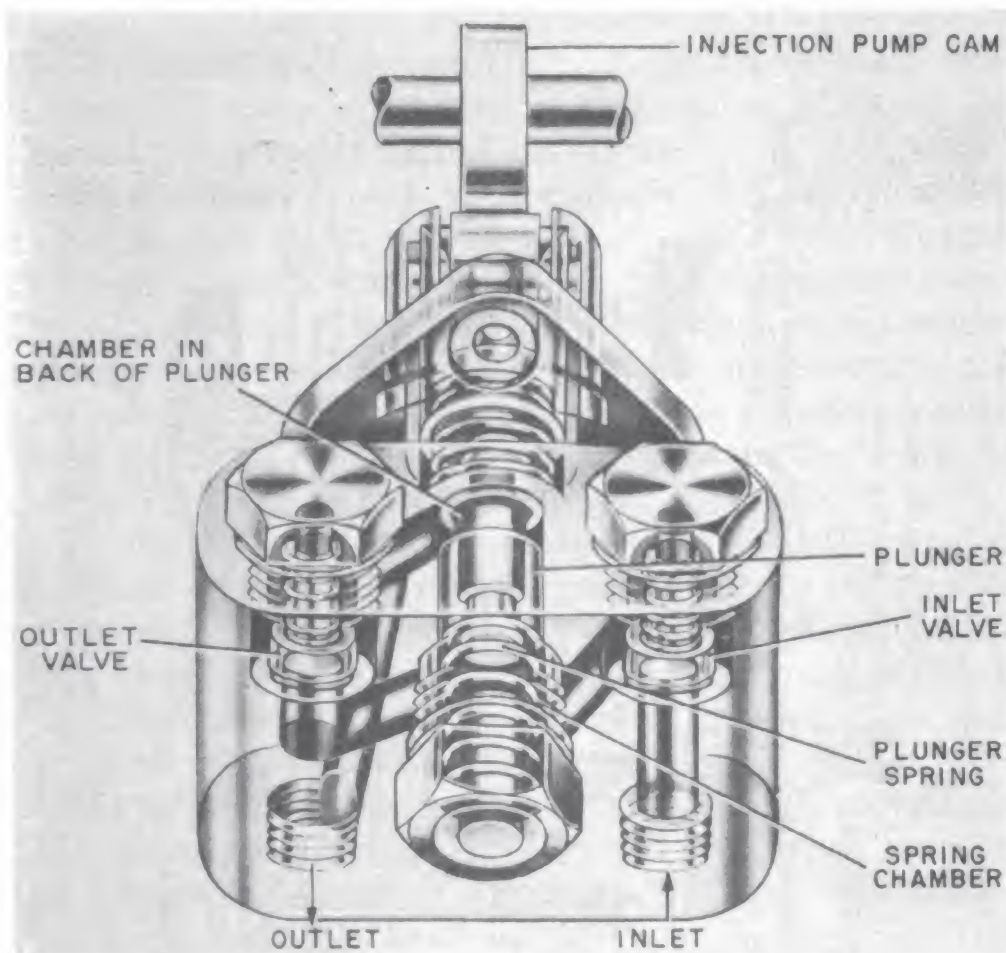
Phantom view of Bosch fuel supply pump.
